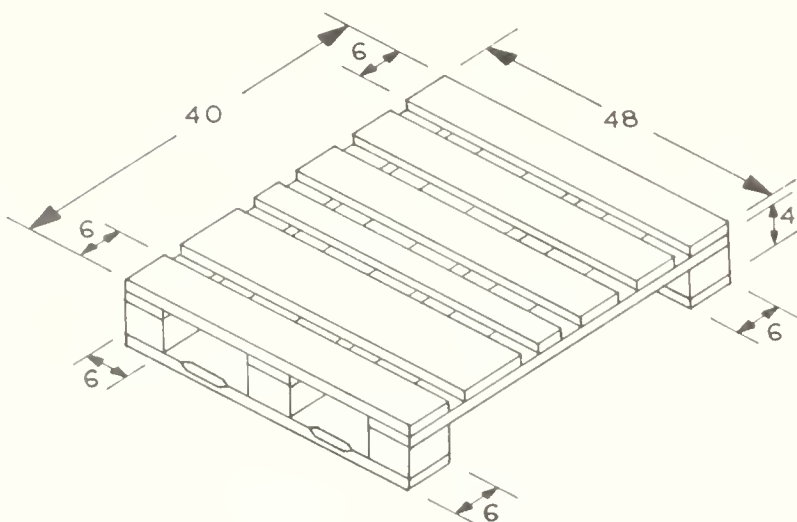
Double-entry pallet. Dimensions are in inches.
